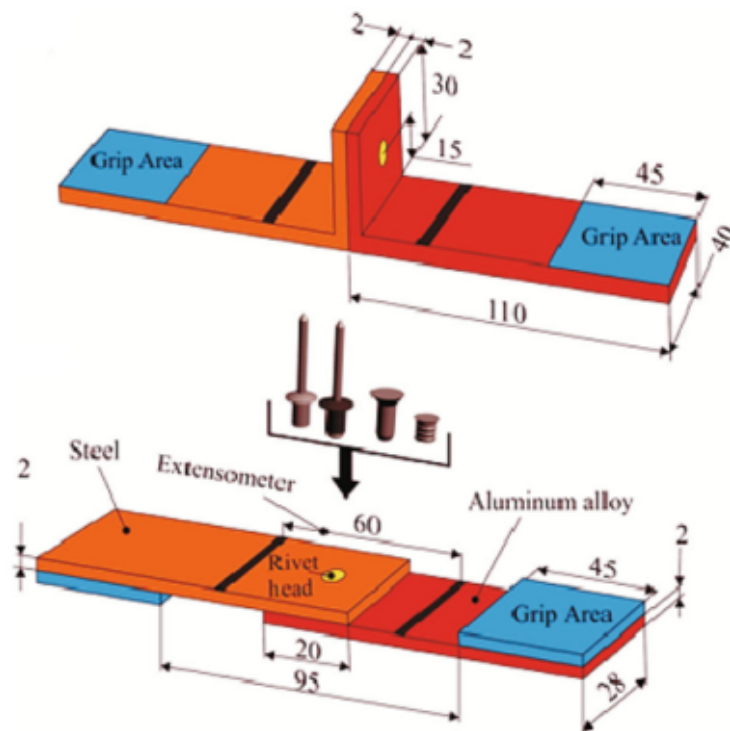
The specimen geometry and rivet head for two joints: T-shaped and lap [53]
